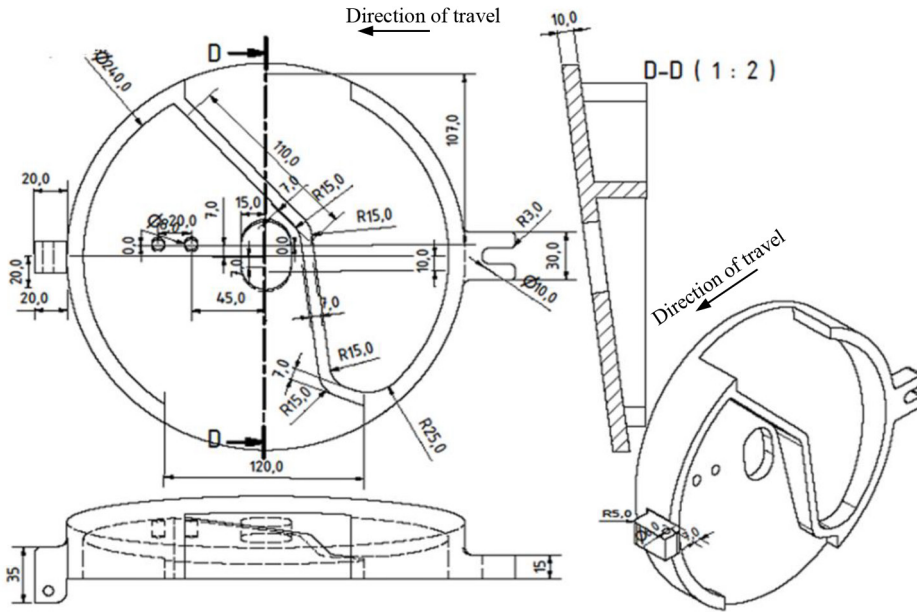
Technical dimensions and view of the right side metering unit in the direction of travel (dimensions are in mm).
